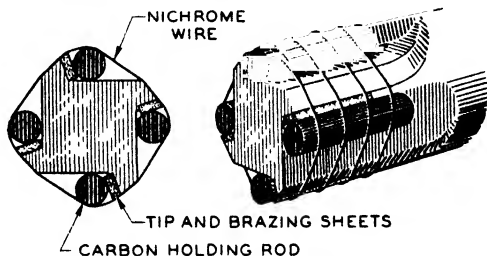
Assembly of a Four-Flute Reamer for Furnace Brazing of Tips
